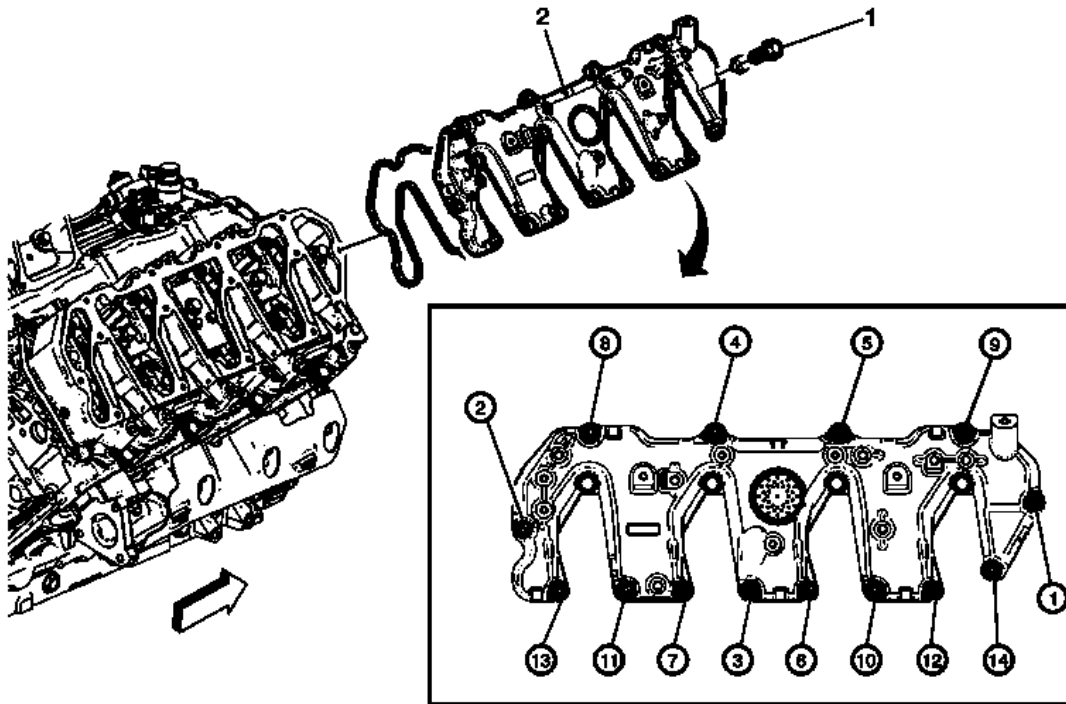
Valve Rocker Arm Upper Cover And Fasteners With Tightening Sequence - Right Side
